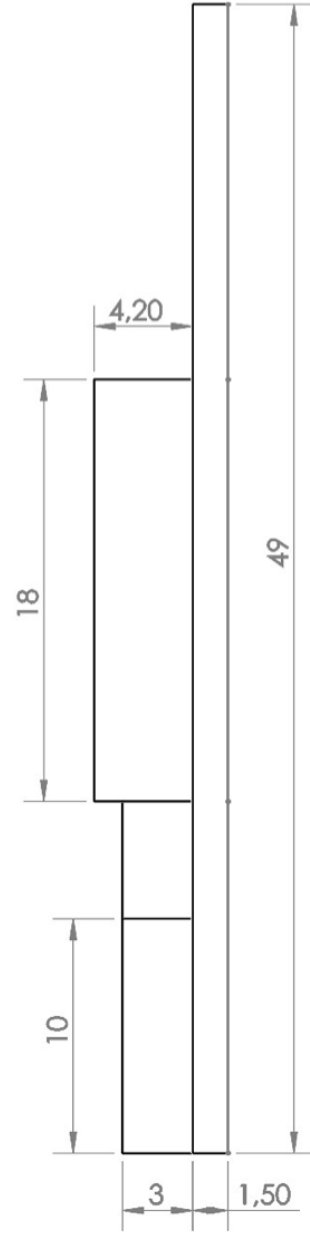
Side view of upper mould with 1.5 mm thickness (dimensions in millimetres).
